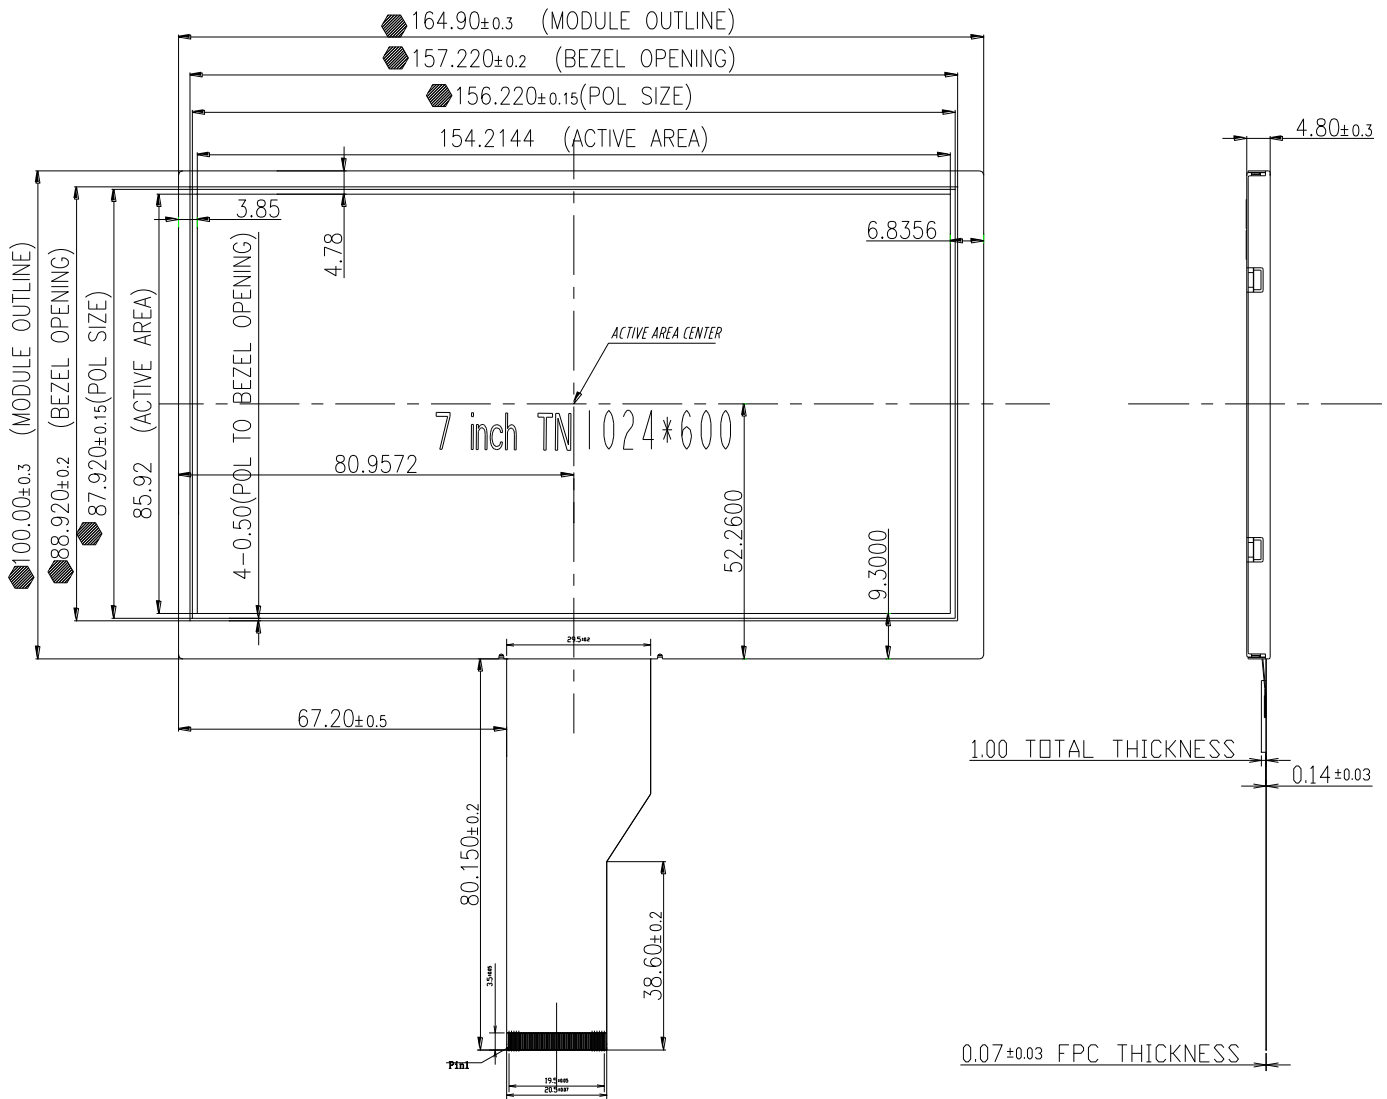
TFT-LCD Module Outline Dimensions (Rear view)
